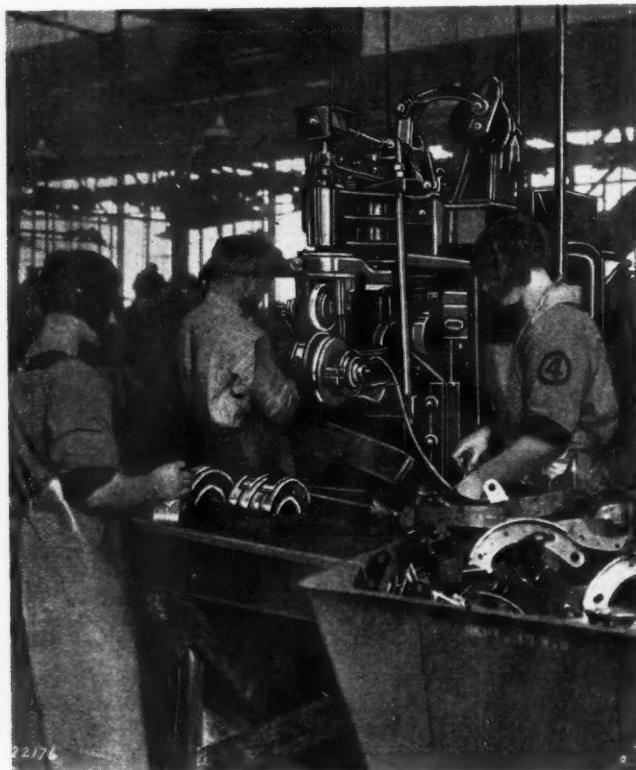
Welding up Bendix brake shoes in Gibb welder with copper roll electrode
